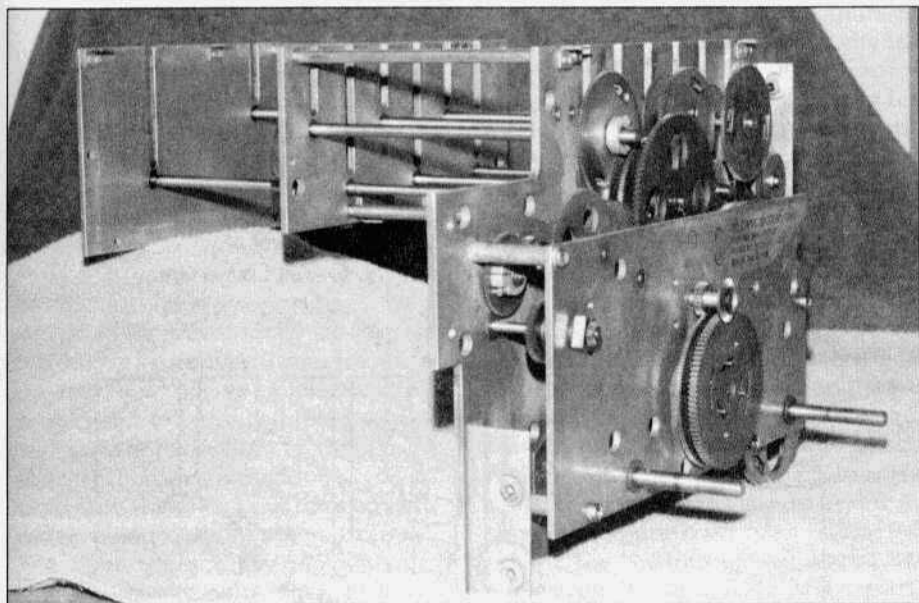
The separated mechanical assembly, all cleaned and ready for lubrication and reassembly.
